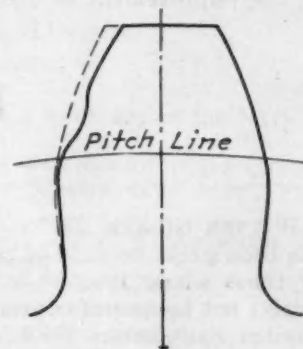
TYPICAL WEAR OF A STANDARD SPUR-GEAR TOOTH, EXAGGERATED
